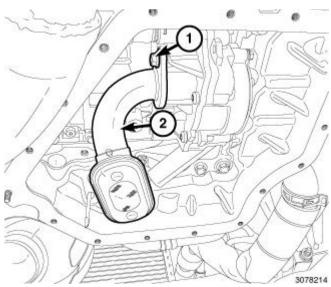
Oil Pump Pick-Up Tube & Bolt Courtesy of CHRYSLER GROUP, LLC
